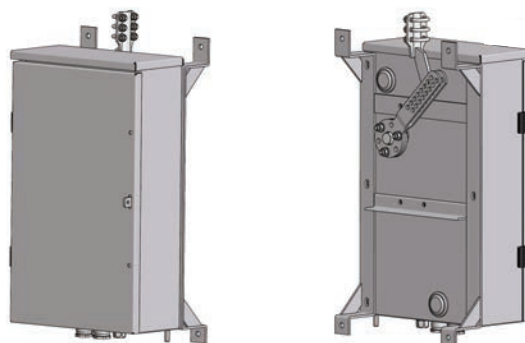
Outdoor motor actuator UM 90 / 350 Nm
